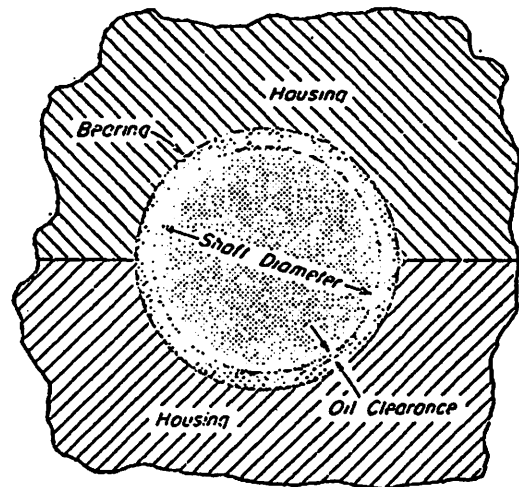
Cross-sectional diagram of a bearing assembly
